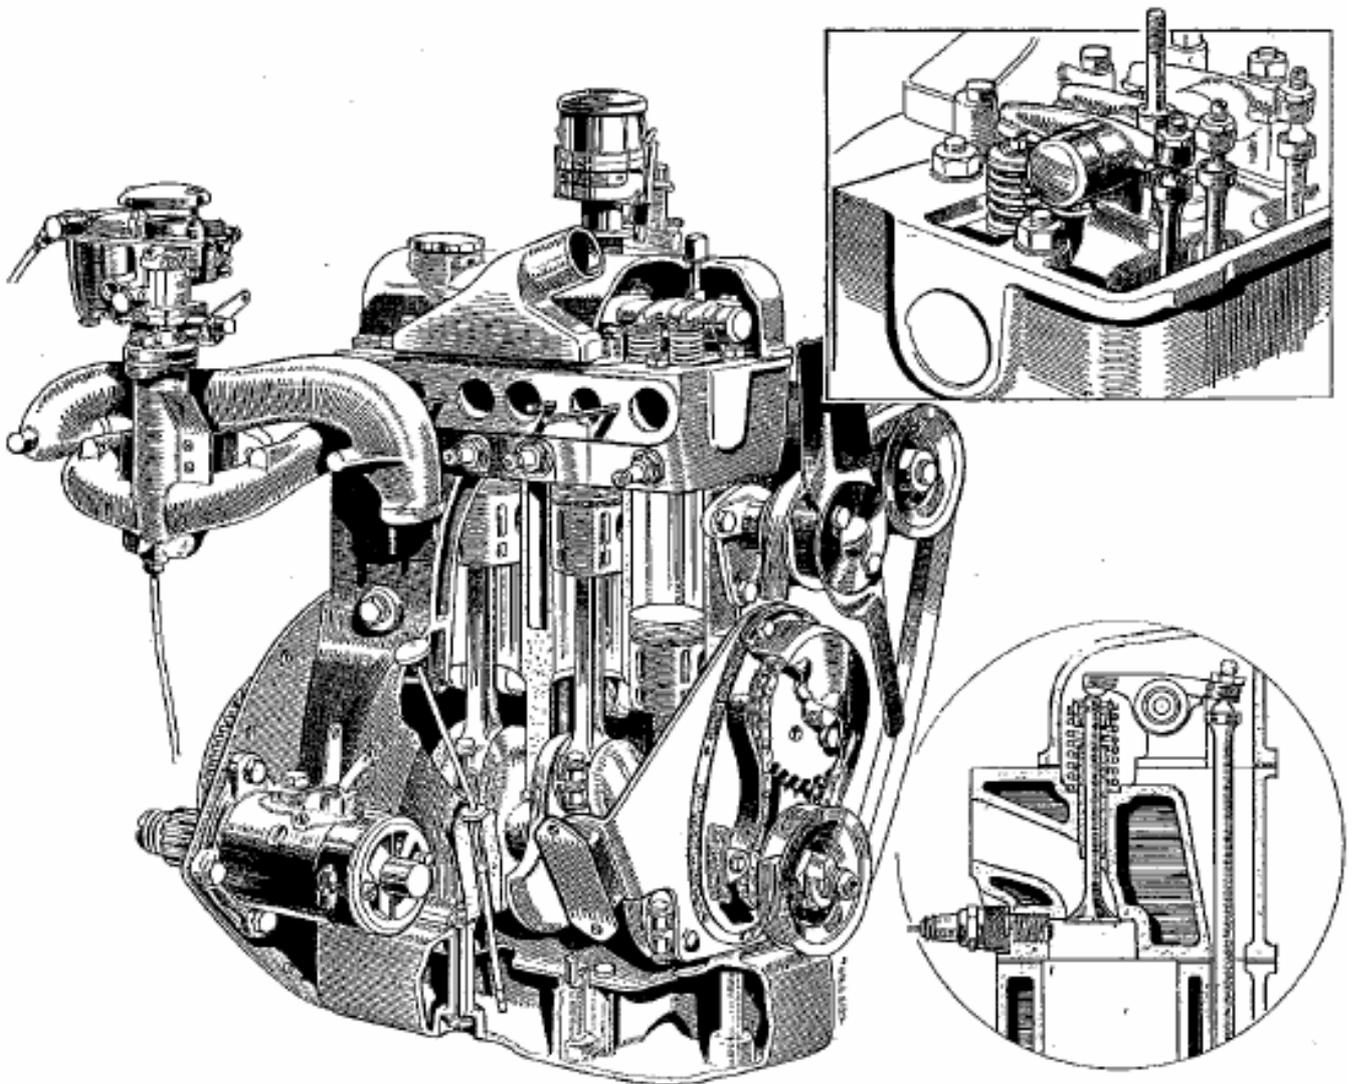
B:1 Sectional view of Standard Special engine (1939) showing manifold and Solex carburettor. Top insert shows overhead rockers and pushrods. Bottom insert shows combustion chamber and position of valve.
